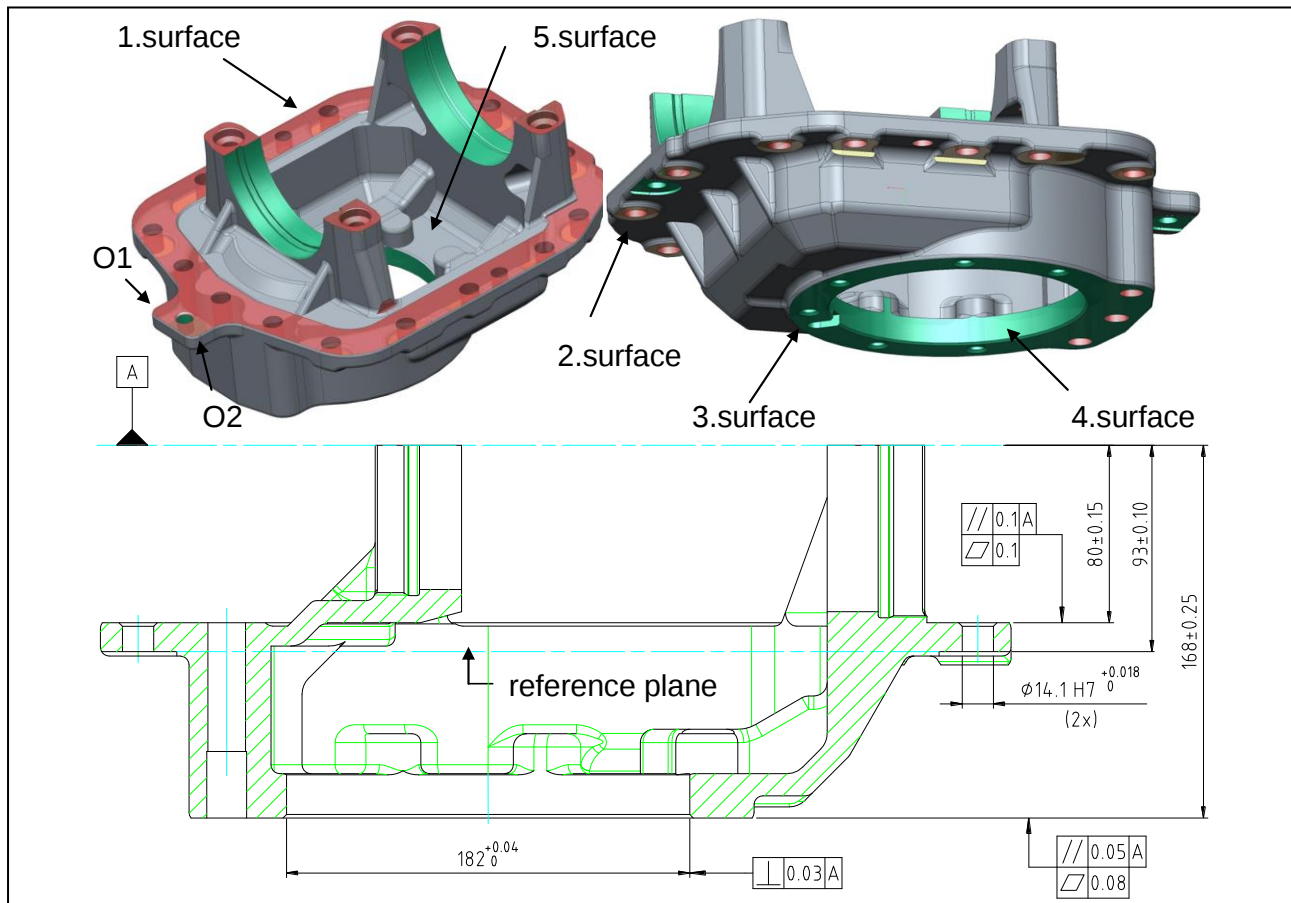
Workpiece configuration and tolerance requirements
